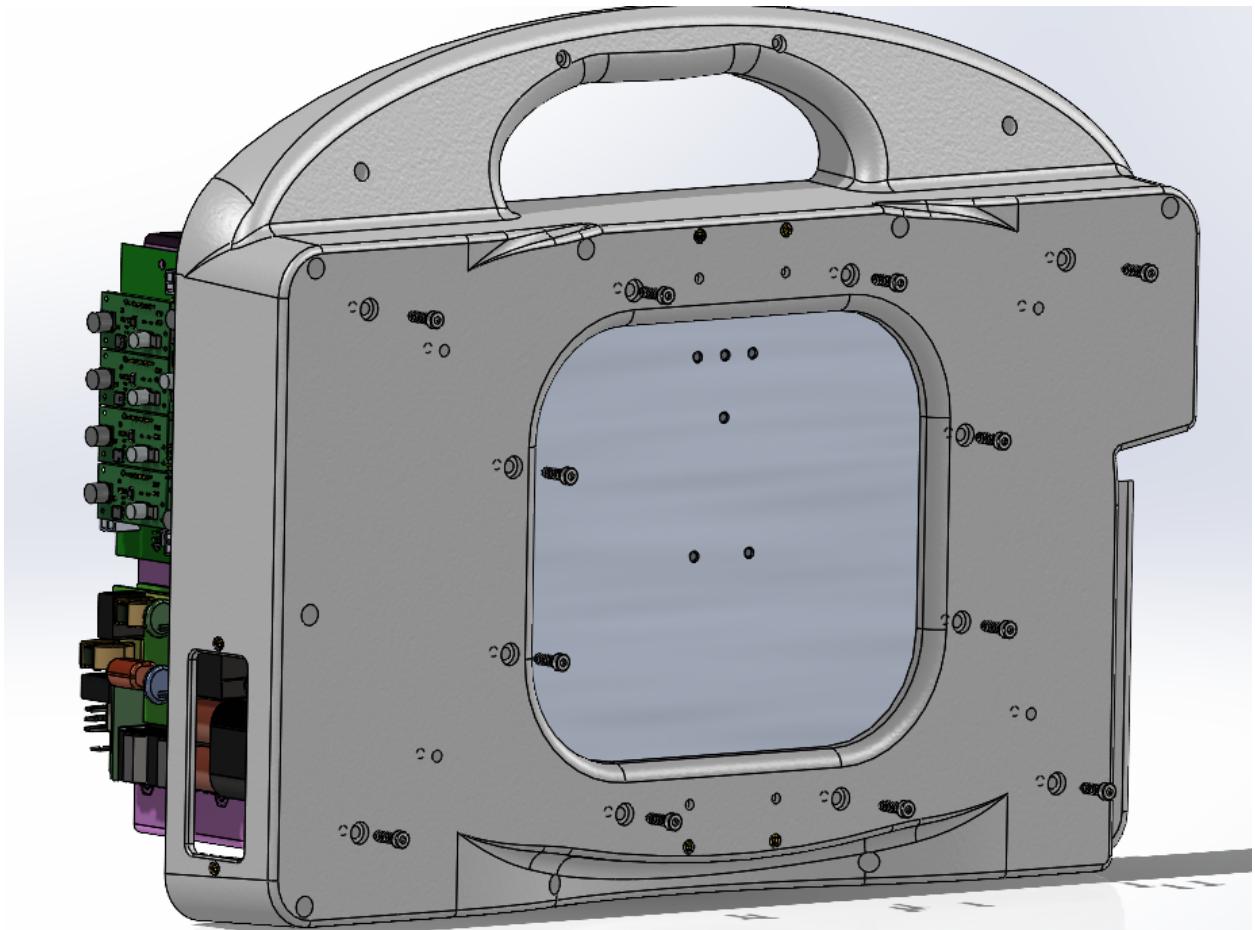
Mounting Base Plate/Electrical Bracket to Back Case
